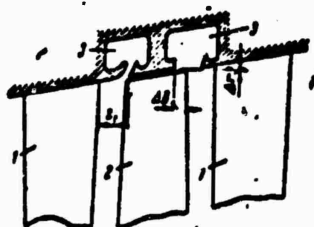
Diagram of recommended BITM moisture-catching devices. 1 - stator blades; 2 - rotor blade; 3 - moisture-catching chamber.
